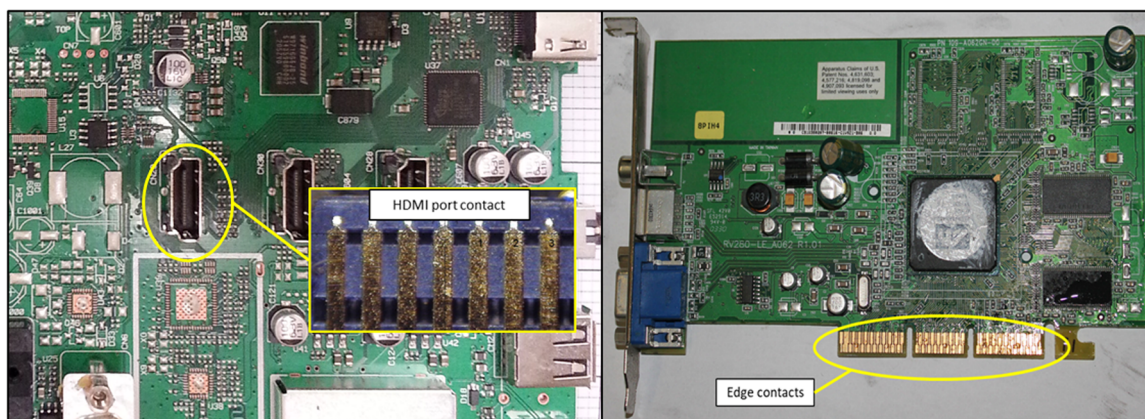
Au coated mounted contacts of HDMI ports on a TV PCB (left) and coated edge contacts of a PCI graphics card (right)
